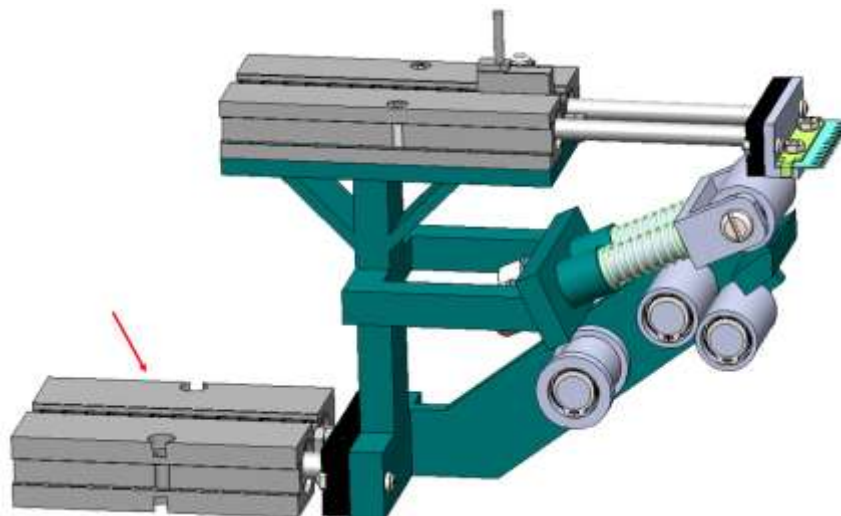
Line-pushing cylinder and line sticking mechanism
